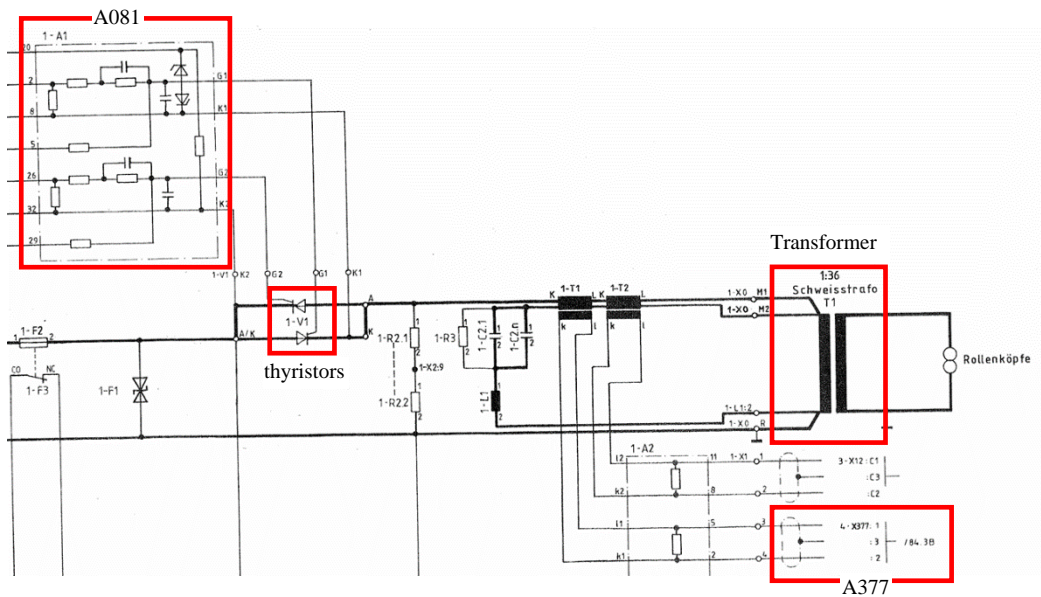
Welding Power Stage Control Scheme (A081 & A377)
